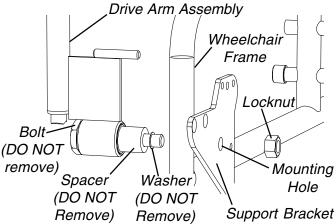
REMOVING/INSTALLING SUPPORT BRACKET TO/FROM DRIVE ARM ASSEMBLY
